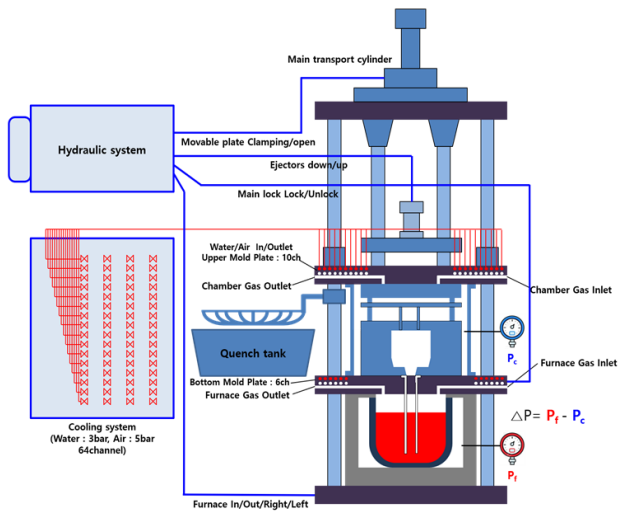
Schematic illustration of counter pressure casting equipment with furnace, chamber, mold, hydraulic unit and cooling channels
